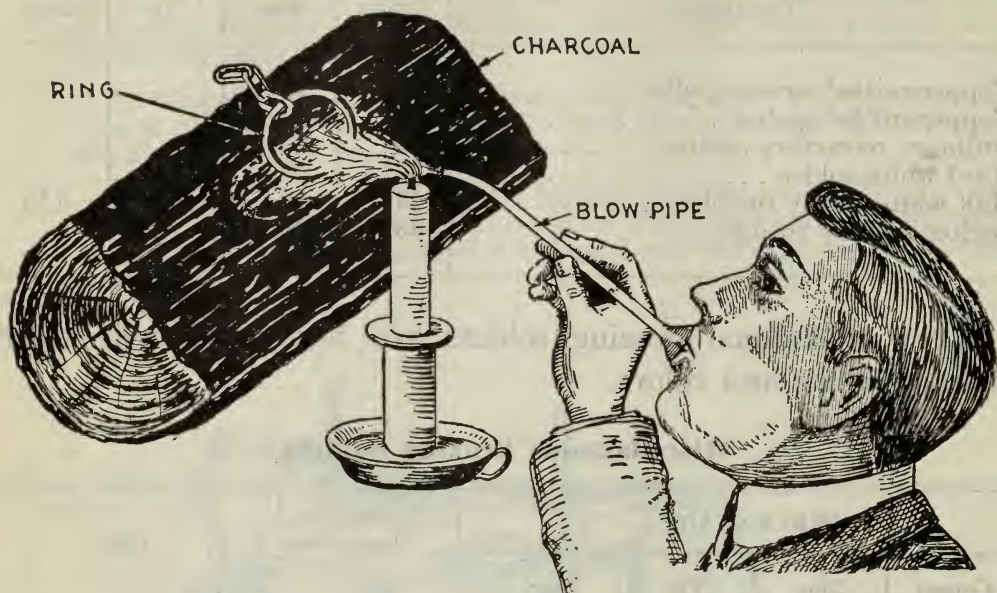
,470.—Brazing a small chain link in charcoal with a blow pipe. Place the broken link in a small hole scooped in the charcoal and heat with the candle flame and blow pipe after applying the solder and flux.
